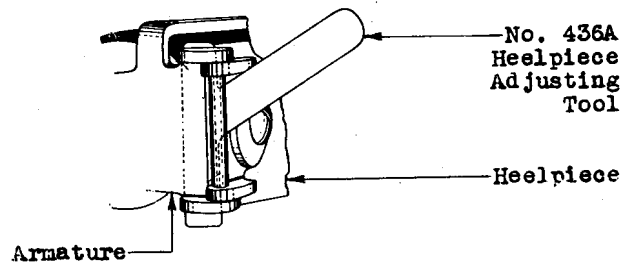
Adjusting the Heelpiece Airgap With the No. 436A Heelpiece Adjusting Tool Inserted From the Heelpiece Side (All Except the Z Position Relays and Relays With Extra Heavy Armature Hinges)
